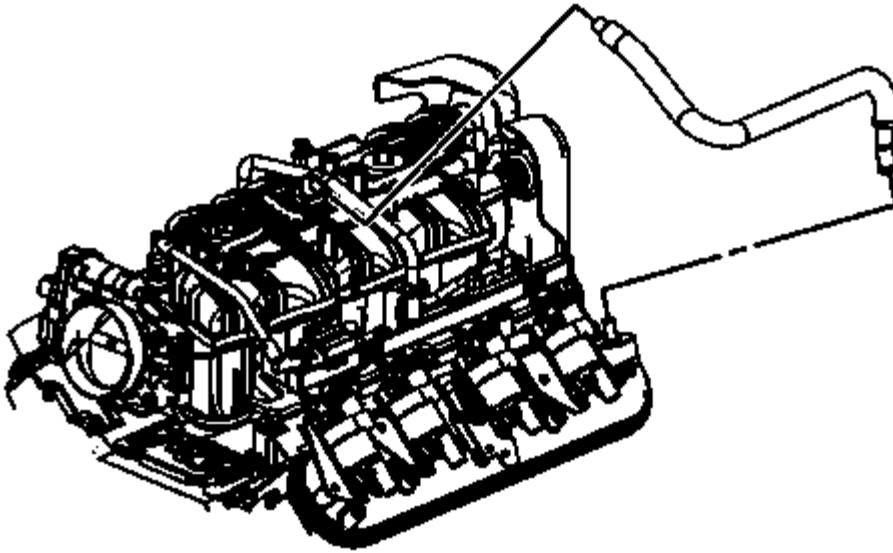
View Of Brake Booster Vacuum Hose & Booster Fitting
